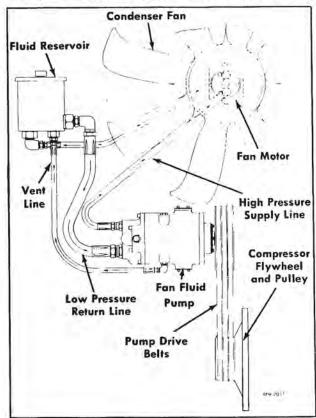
Schematic of Condenser Fan Drive Lines, and Units
